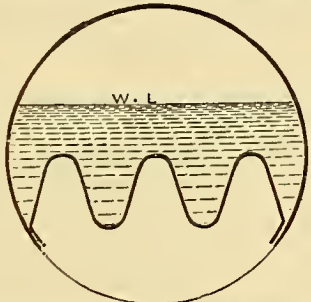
ANOTHER FORM OF HORIZONTAL BOILER IN SECTION.
